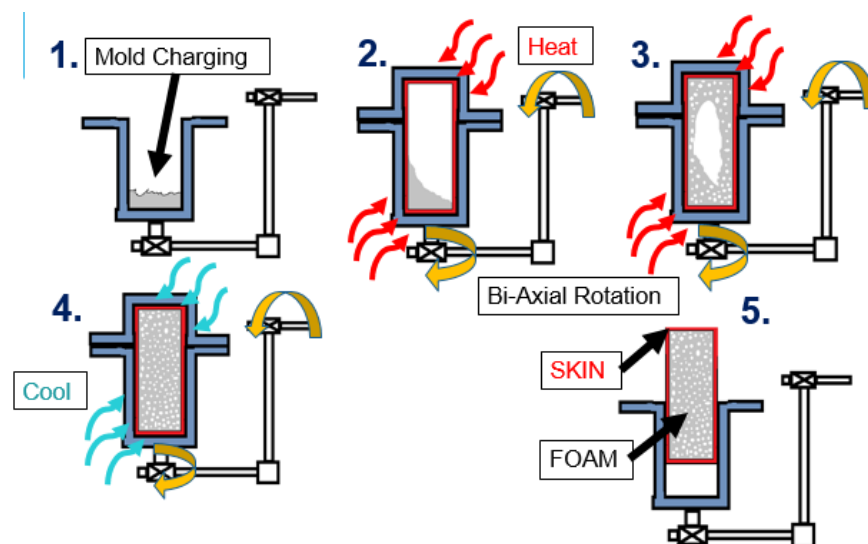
Single-step rotational foam molding process of skin encapsulating foamed core.
